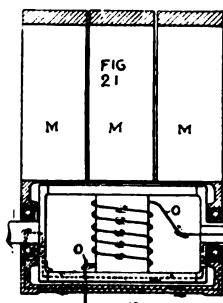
shows a sectional view of a low tension magneto, O is the primary winding on the shuttle type of armature, of which there are several layers of coarse copper insulated wire (only one layer is shown). This wire connects
